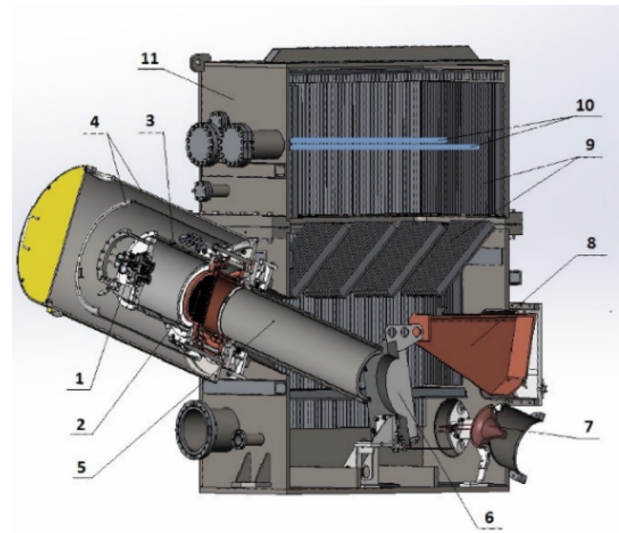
3D model of the DNB injector vacuum vessel (cross section): 1—plasma generator, 2—ion optical system, 3—plasma expander, 4—electromagnetic shielding, 5—neutralizer, 6—bending magnet, 7—movable beam collector, 8—ion beam dump, 9—finned panels, 10—titanium gettering rods, and 11—injector vacuum tank.
